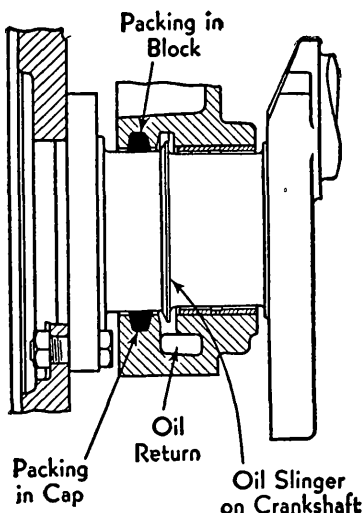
Rear main bearing oil seal, 1937-50 L-Head
